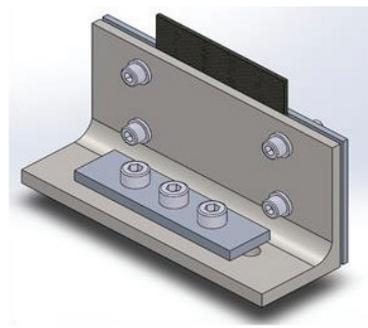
Bespoke fixture design for clamping the GFRP sample
